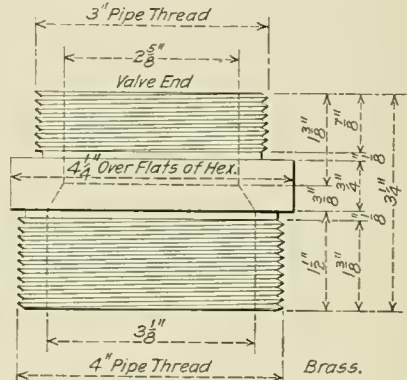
Bushing for Replacing 3 1/2-Inch Valve with 3-Inch Valve
